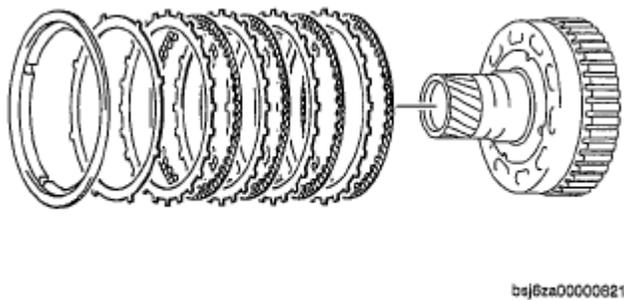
Identifying Retaining Plate, Drive Plate And Driven Plate
